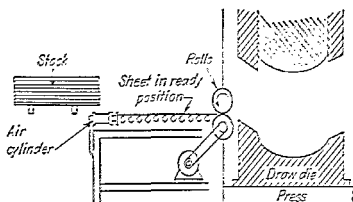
Roll feeder for feeding large sheets to drawing operations. (K. C. Butterfield.)
